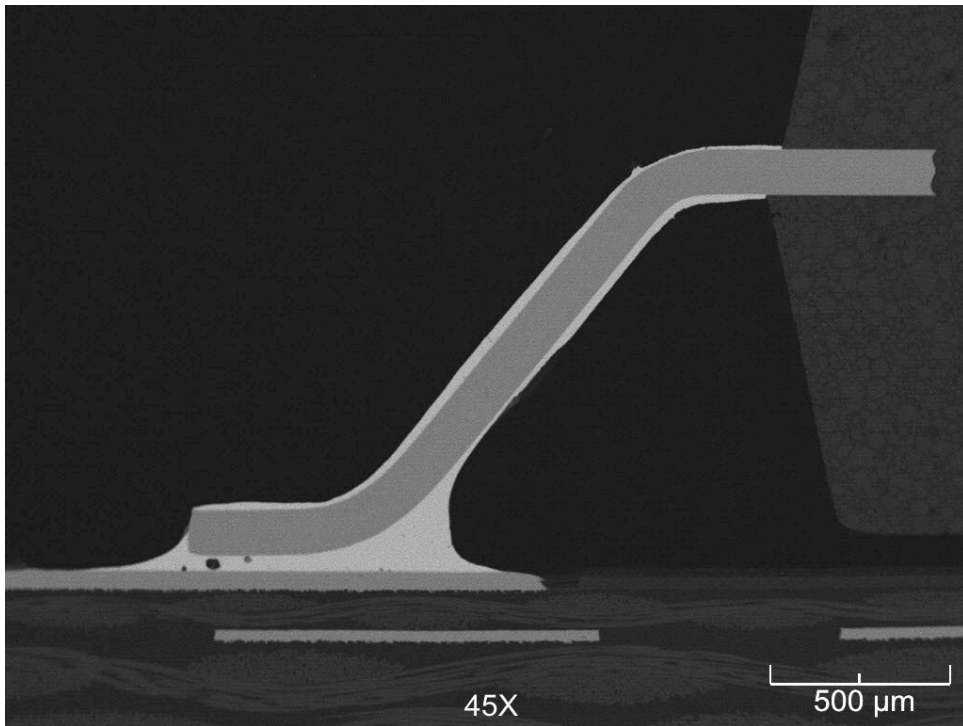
172 HDQFP Gull Wing solder joint (45X)
